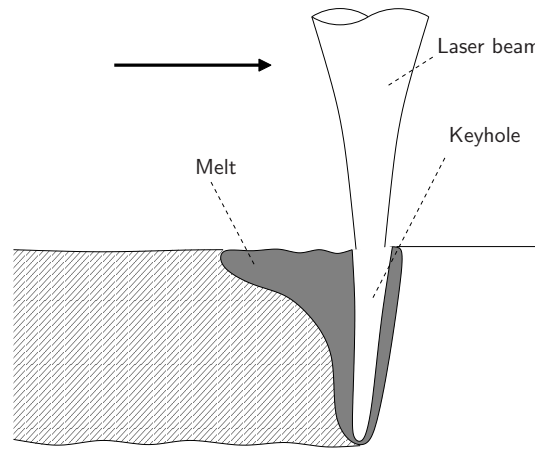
Schematic view of a laser welding process. The laser beam moves from left to right melting the material and the weld seam is created after resolidification.
